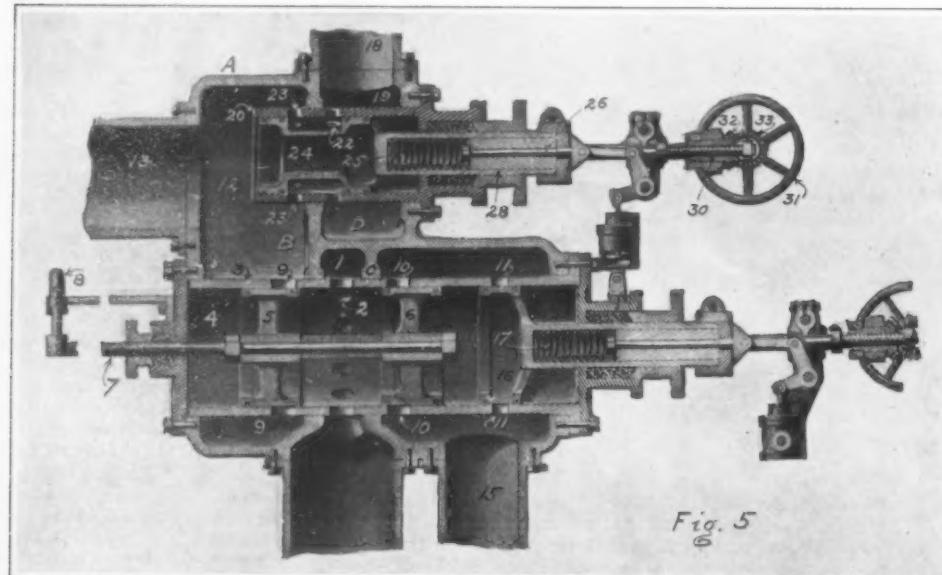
Detail of controlling gear shown in connection with cylinders and boiler in Fig. 4.
